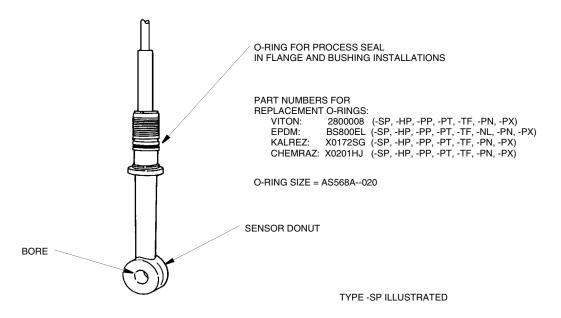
Sensor Types -SP, -HP, -PP, -PT, -NL, -TF, -PN, and -PX O-ring Seals
